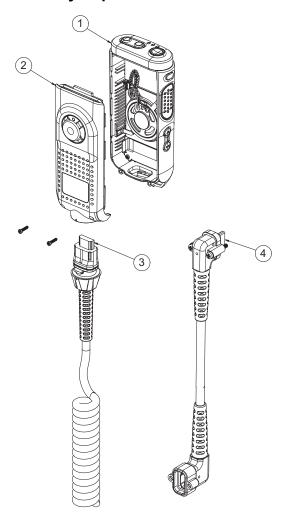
Control Head Assembly Exploded View for PMLN7032
